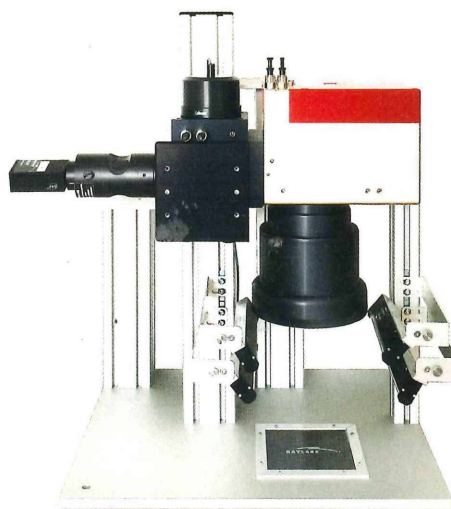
On-axis machine vision control – combining a laser deflection unit with a camera coupled into the path of the laser beam
